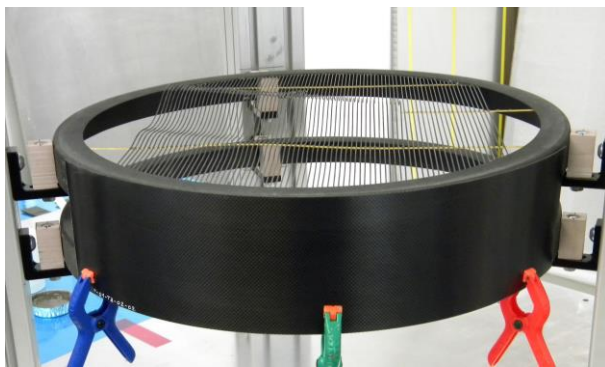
Technical Demonstrator for a Shaped Grid (HPS)
